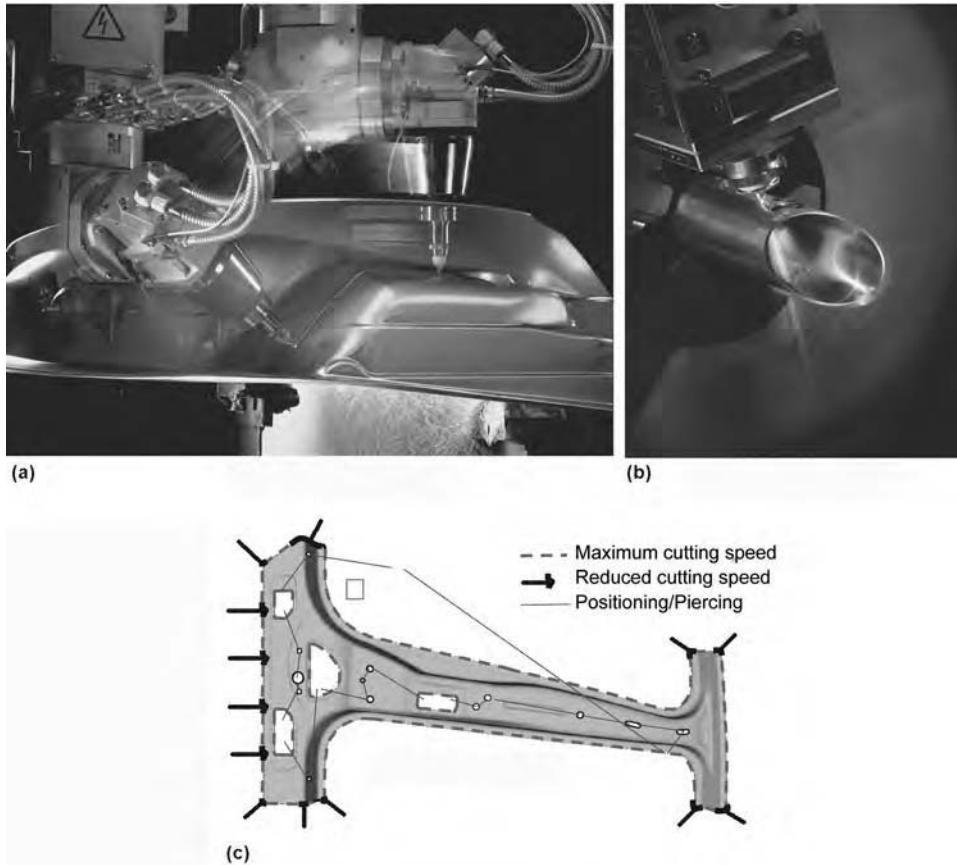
(a) High-volume, three-dimensional (3-D) production CO₂ laser cutting of automobile steel components. Courtesy of Trumpf Inc. (b) Cutting of copper tubes with fiber laser. Courtesy of BLM Group. (c) B-pillar component illustrating guidelines for reducing speed and consequently adjusting power, required at small-radius features when performing 3-D cutting. Arrows show regions where cutting speed is reduced. Courtesy of Trumpf Inc.
